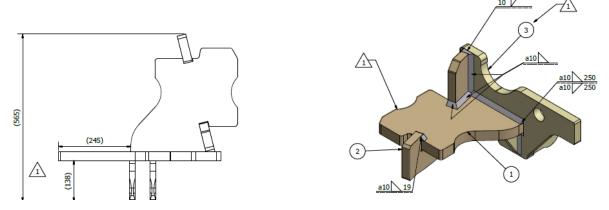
Welding sheet of drawing. One weld is visible in orthographic view and should be hidden.
